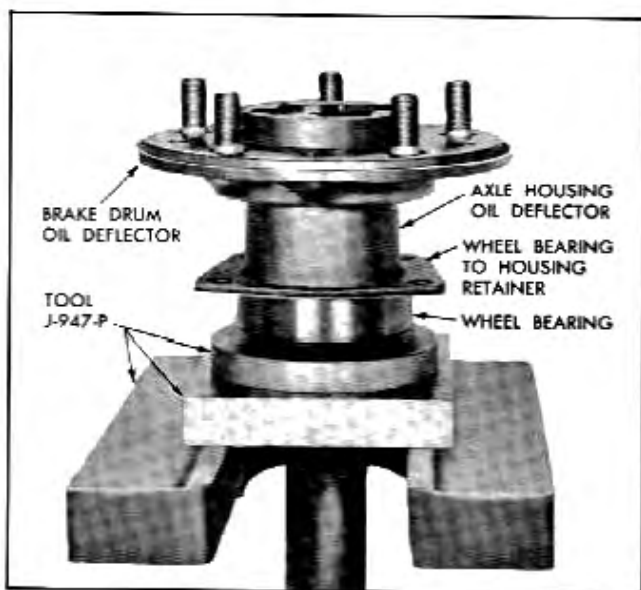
Bearing Remover and Replacer Tool J-947-P in Place for Pressing Bearing on Shaft
